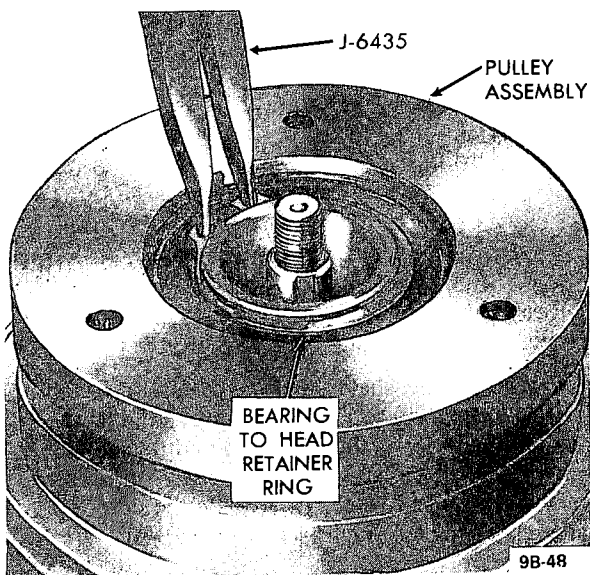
B-72 Removing or Installing Bearing to Head Retainer Ring
